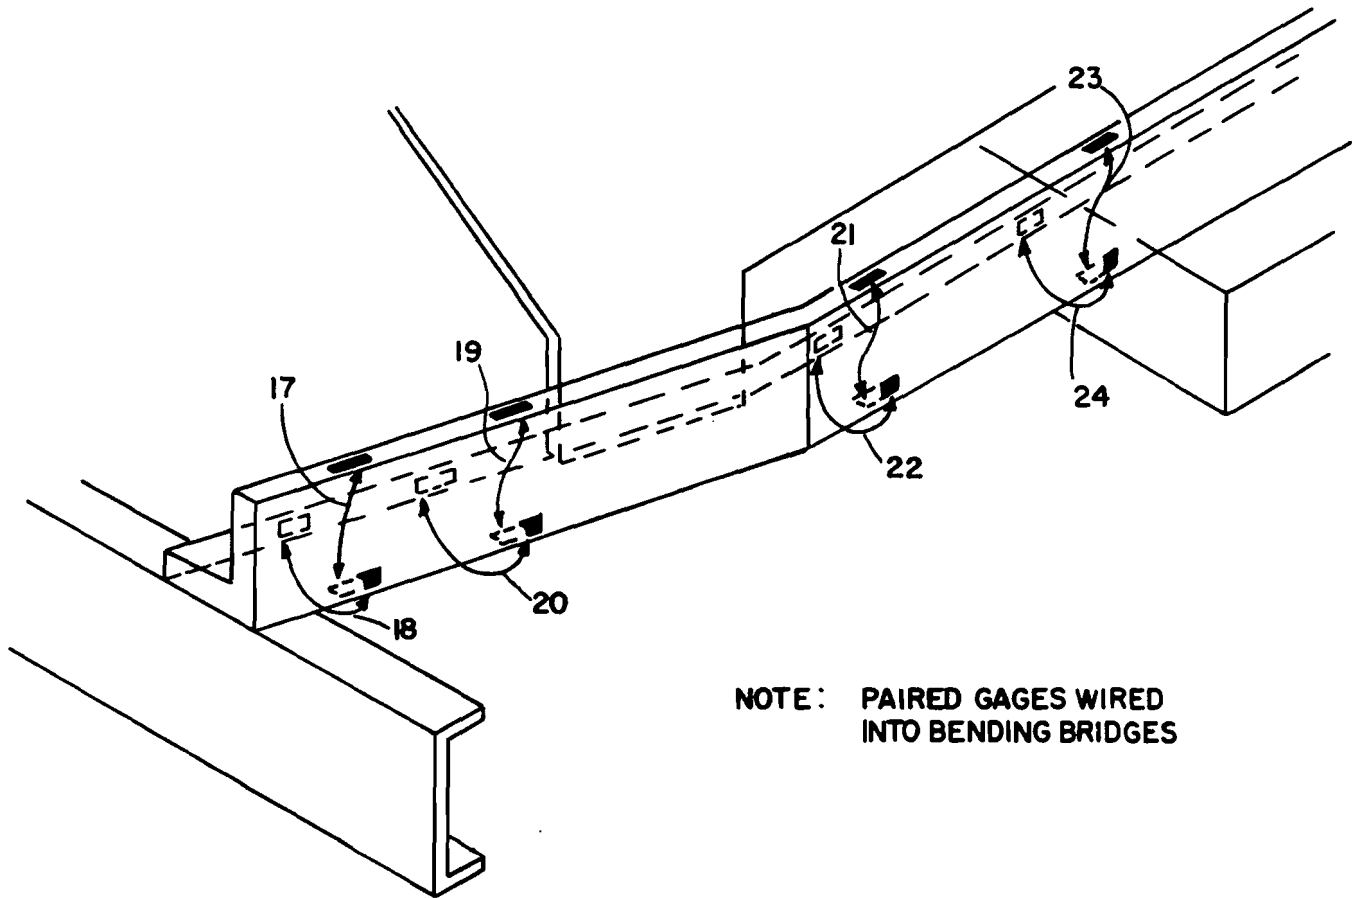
GAGE PLACEMENT DETAIL FOR HEAD SHIELD SUPPORT ANGLE ON LEFT SIDE OF CAR.
